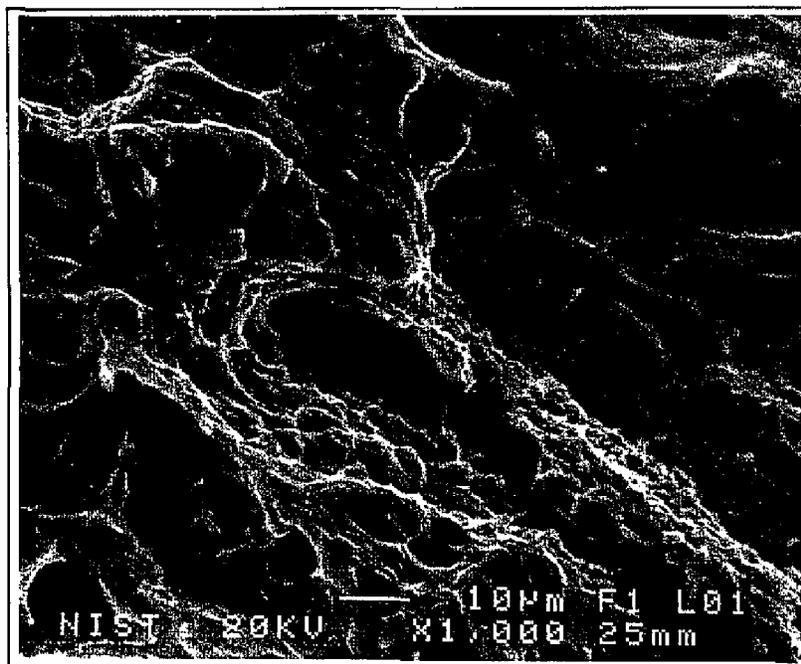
FRACTURE SURFACE OF THE SHOULDER OF THE RUPTURED CYLINDER THAT SHOWS DUCTILE TEARING TYPE OF FRACTURE (MAG. 1000X) -- ITEM 3A
